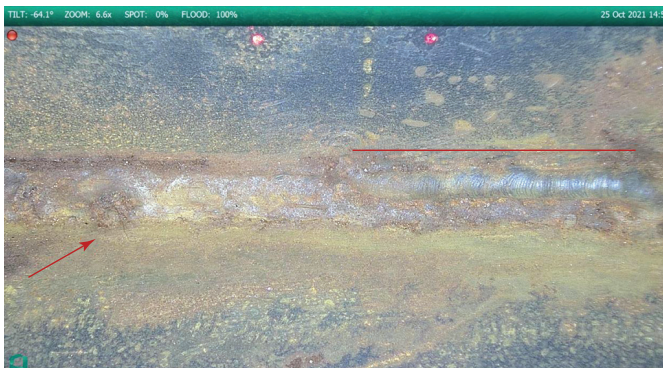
Close-up of a support weld with some annotations. Note the two laser dots that allow a rough dimension of findings.
